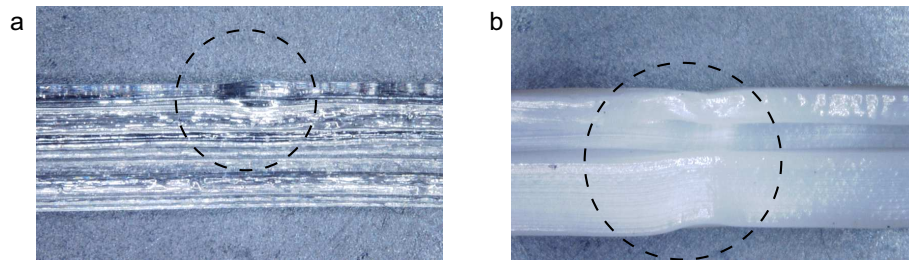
Images of extruded polymer strips, under a microscope, showing common defects during fabrication. (a) Defect caused by the presence of moisture in the material leading to a trapped bubble during extrusion. (b) Inconsistent cross section due to variation in drawing force.
